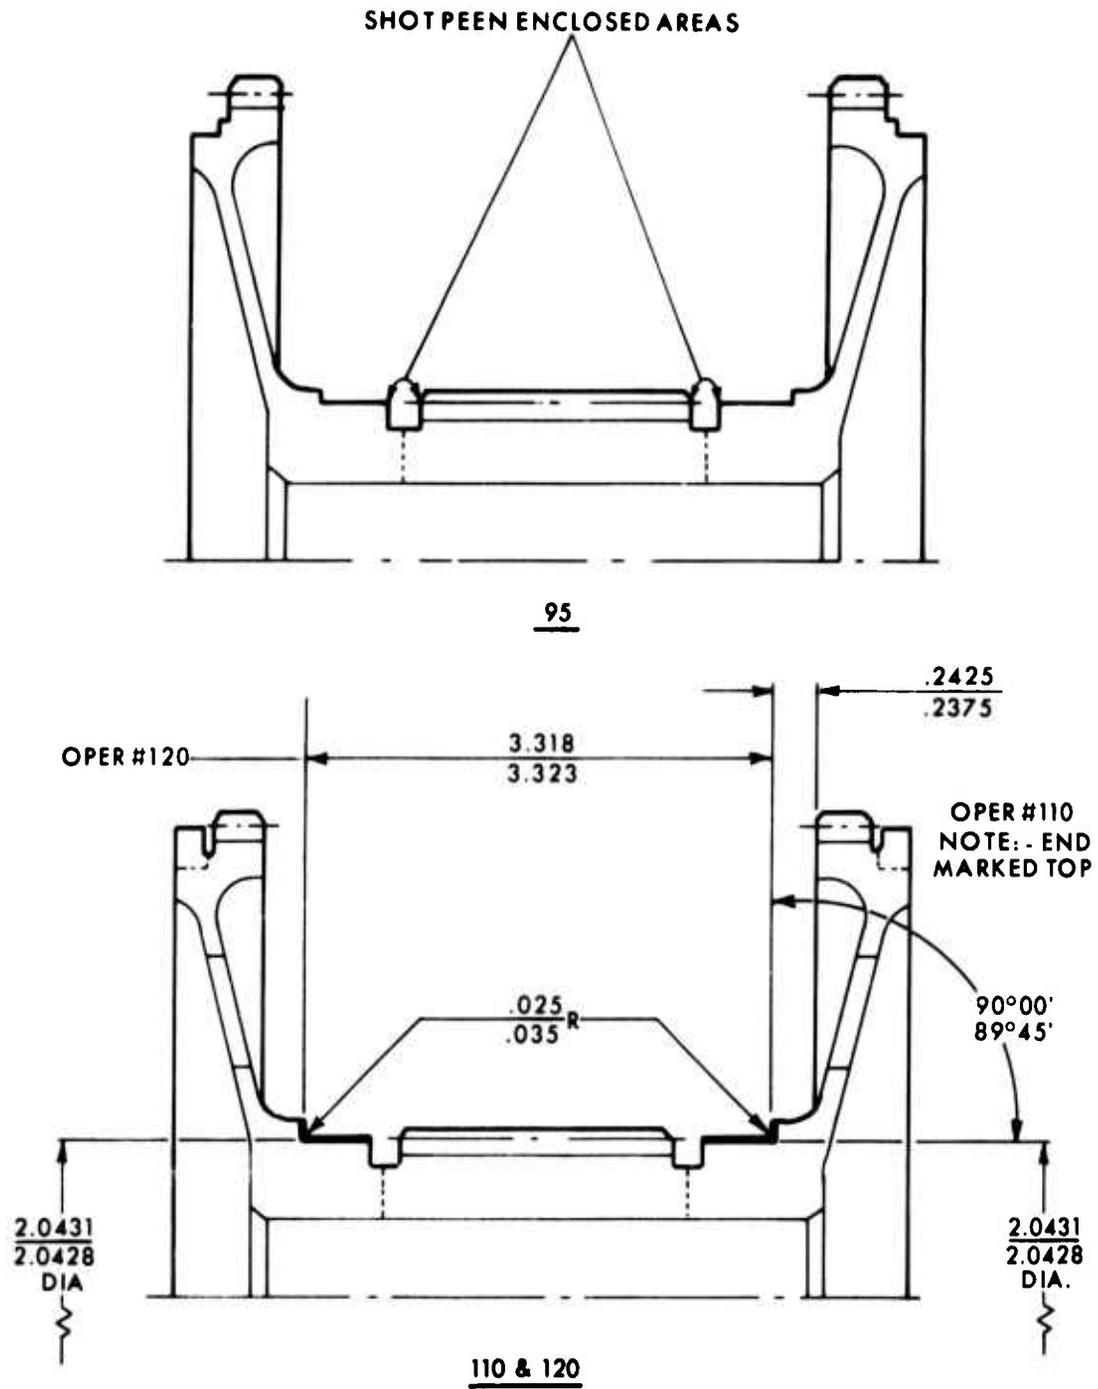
RG351-11182-061, Machine Operation Drawing.
